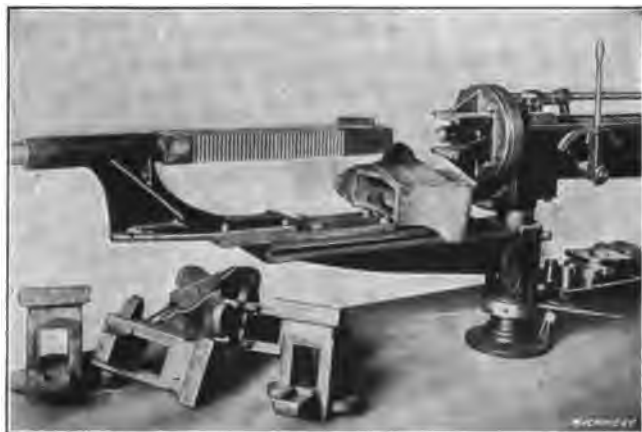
Showing Heavy Broach supported on Bracket ready for placing Work in Position.
